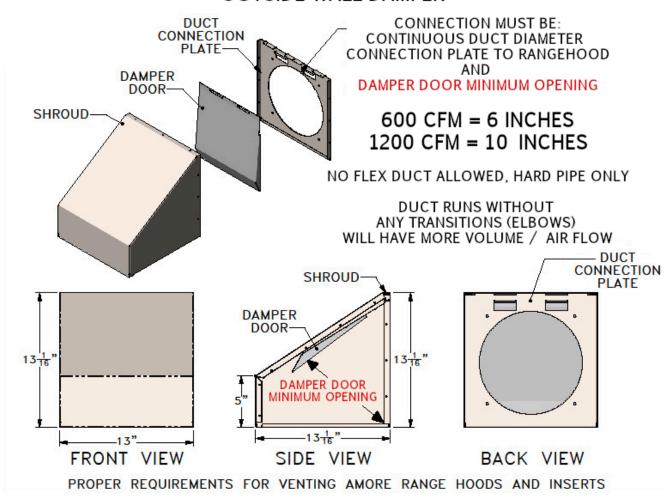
DUCTWORK AND DAMPER REQUIREMENTS
